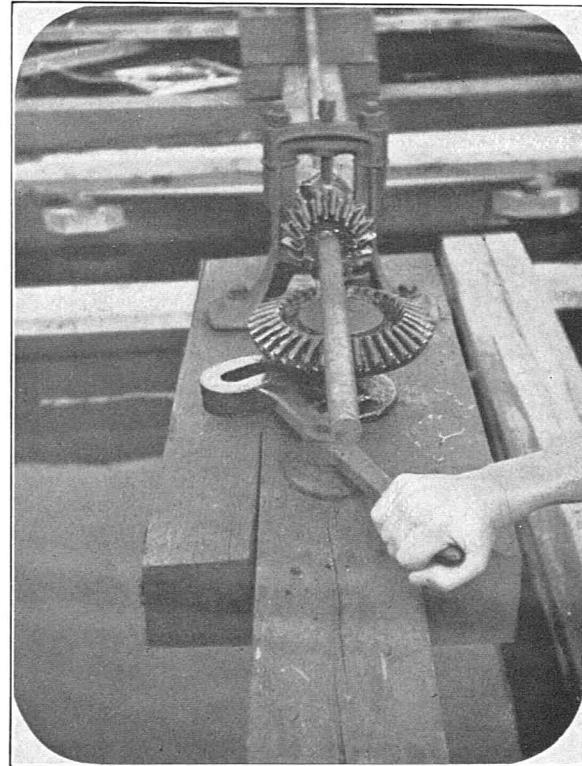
Device for throwing propeller out of gear. (Compare fig. 21.) This figure shows the propeller shaft gear dropped down so as not to engage the smaller gear on the longitudinal shaft.
